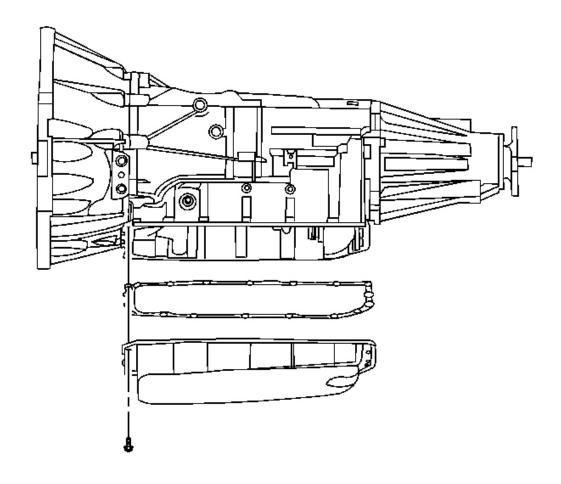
View Of Transmission Oil Pan & Filter Courtesy of GENERAL MOTORS CORP.
